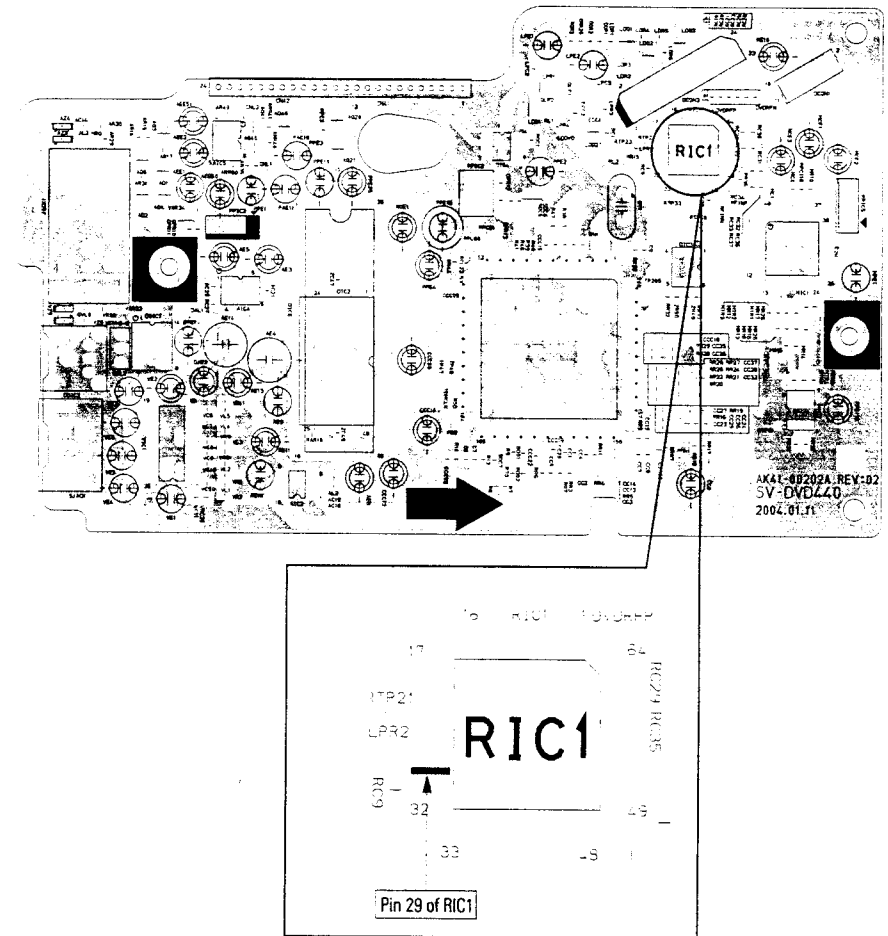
Location of test Point (Main PCB - Top Side)
